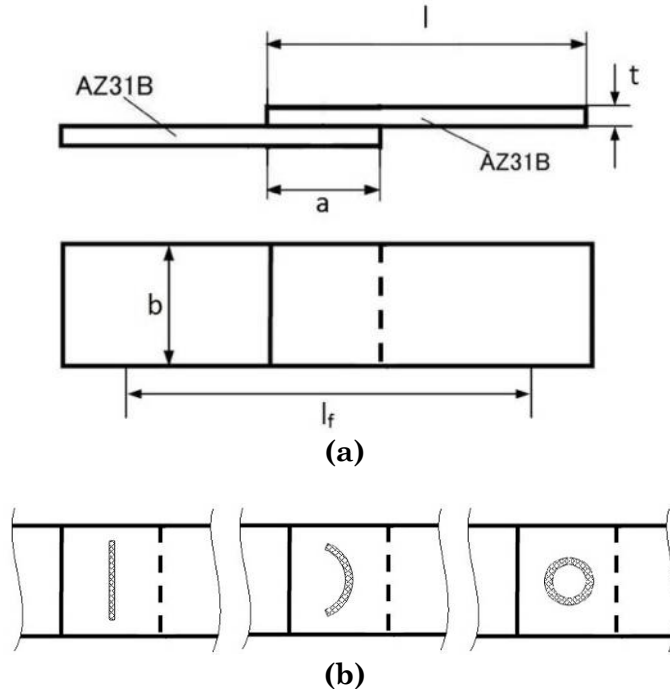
Specimen dimensions and configurations for tensile shear and fatigue testing after laser welding (a), and the laser welded joint shapes (b)
